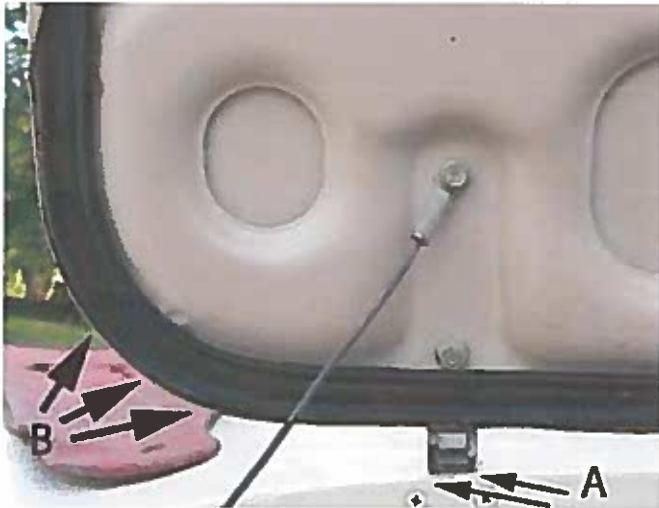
Gaskets are most easily installed with the boot lid off the car. Start gasket installation at the center of the forward edge. Apply adhesive (contact cement is good) to the bottom surface of the gasket and mating area on the lid. The trick to having the seal stay pressed up tightly against the boot lid flange in the corners (arrows B) is to compress the gasket by pushing it longitudinally back towards the part that has already been stuck to the lid as you progress through the turn. This puts corners into compression and the rubber will expand outward laterally to nest nicely against the flange. Trim gasket pieces to length in-situ on the lid and use adhesive to butt-join the ends. Note that boot lid hinges have sloped bottom surfaces so that the hinge pins will line up between the left and right sides. Also note which bolt is used to attach the boot lid stay cable (no flat washer under the stay's tab). (Photo courtesy of George Baxter)
